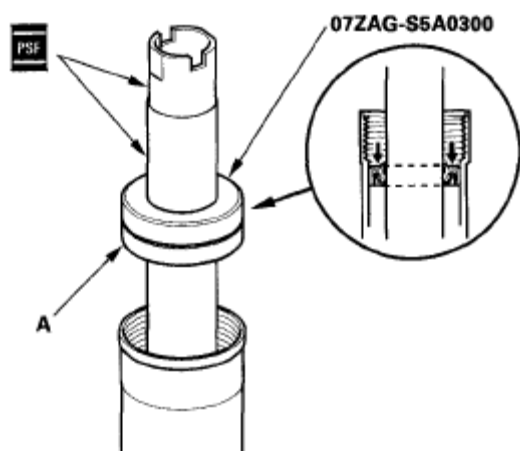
Identifying Cylinder End Seal Slider And Steering Rack
